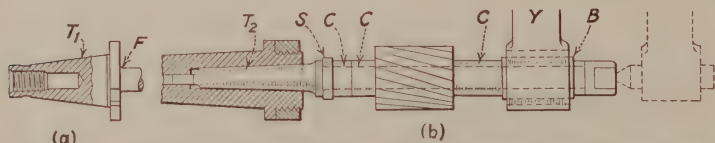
Milling-machine arbor: T_1 shows modern type of taper shank; T_2 , old type of taper shank. F , fillet, gives extra strength and stability; S , special collar to cover fillet; C , regular collars; B , special collar fits bronze bearing in yoke Y . The outer end of the arbor is threaded for the nut. In those machines (Brown & Sharpe for example) where the cutter normally runs left-hand the arbor and nut are threaded left-hand, and thus the pressure of the cut does not tend to loosen the nut. Dotted lines show yoke center in end of arbor.
